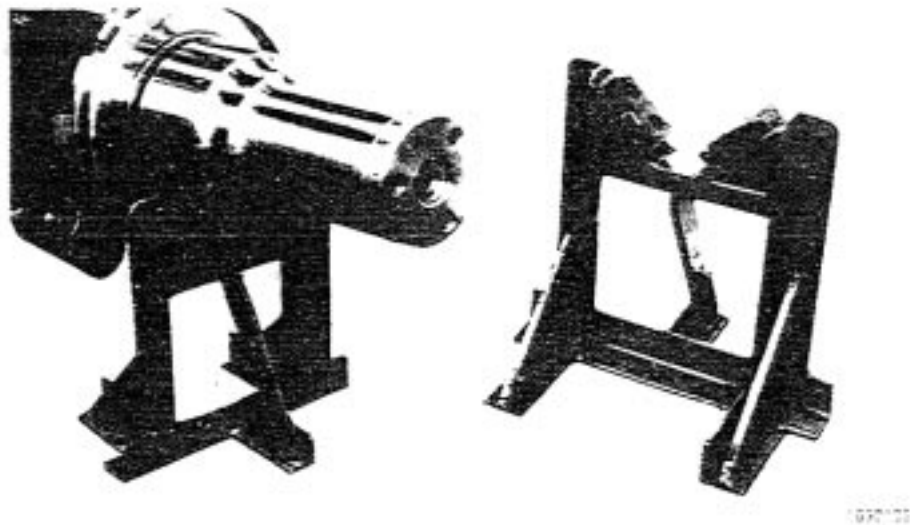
Axle Assembly Support Frame with "Soft" Axle Contact Surfaces
